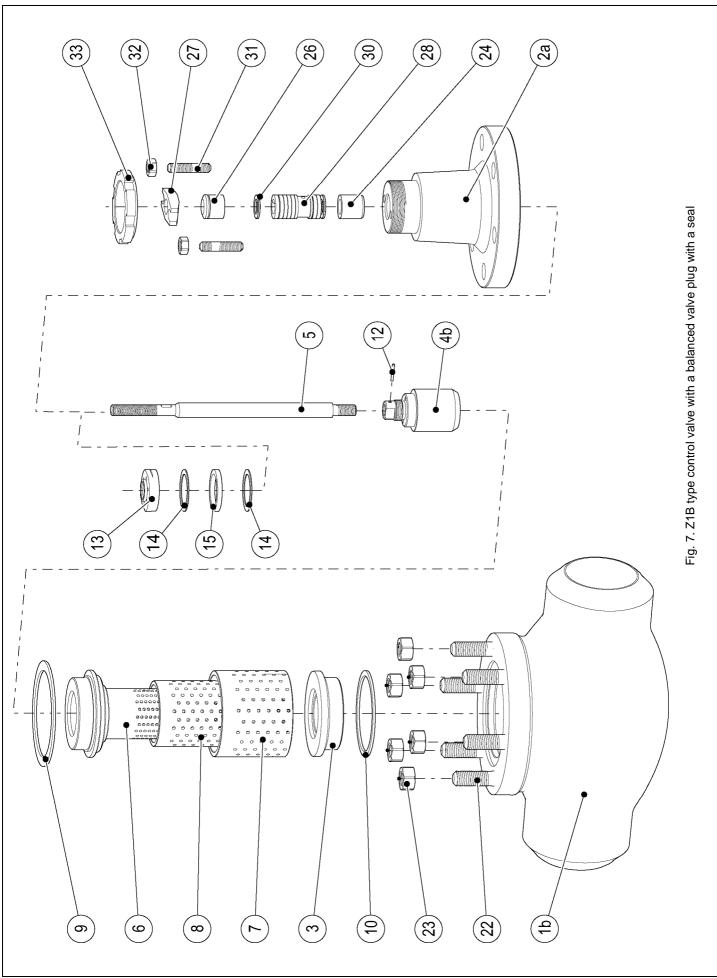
Z1B type control valve with a balanced valve plug with a seal
